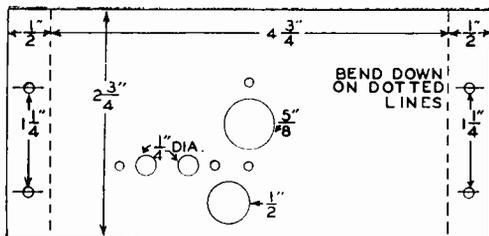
Subchassis layout. No dimensions for crystal socket are shown. Drill holes to fit the socket you intend to use.
